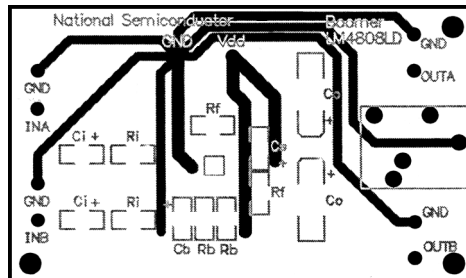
Recommended LD PC Board Layout: Bottom Layer
